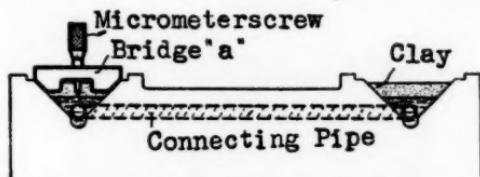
Surface of liquid and measuring point. Using vees of bed as water channels when erecting machine.
